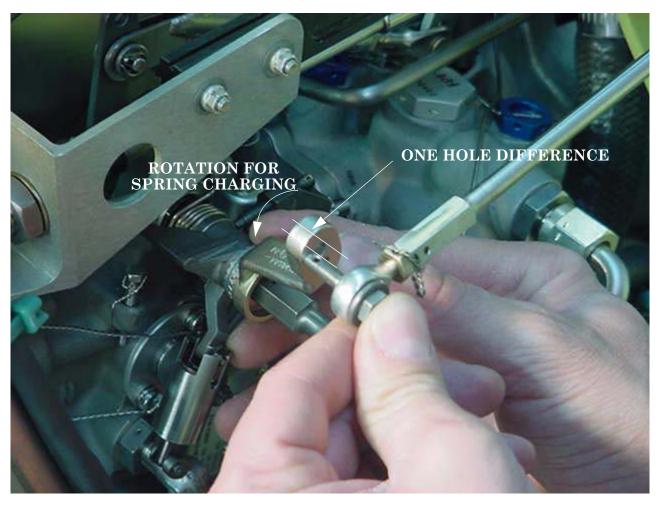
Fuel Control Unit (FCU) - Dead Band Adjustment (Sheet 6 of 6)
